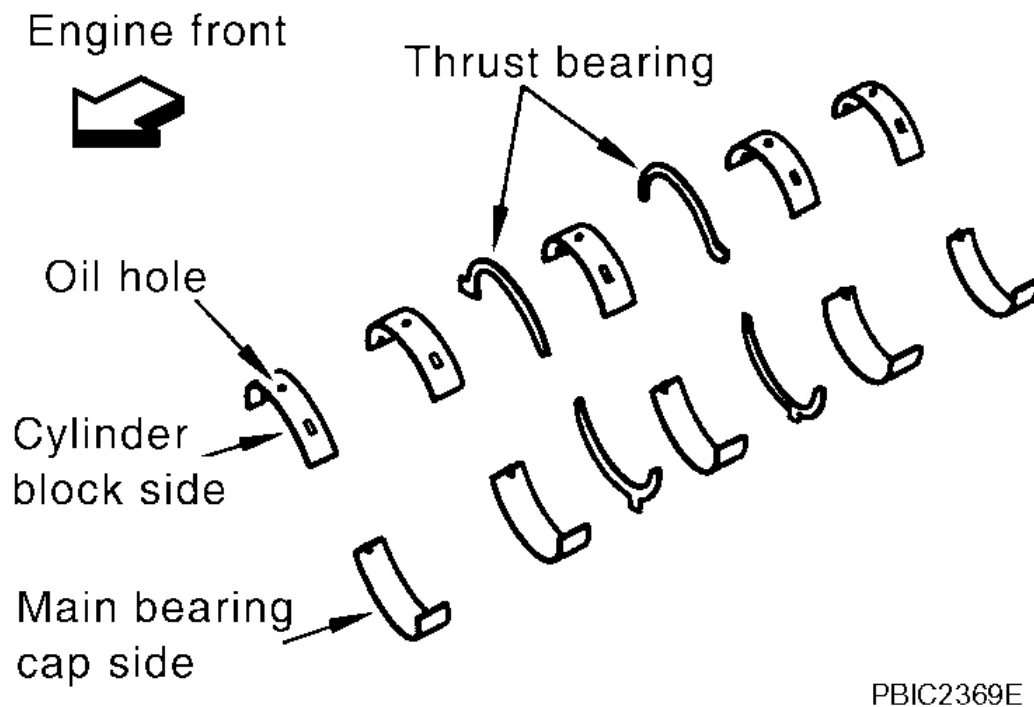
Identifying Thrust Bearings With Oil Groove On Cylinder Block And Main Bearing Cap Side
